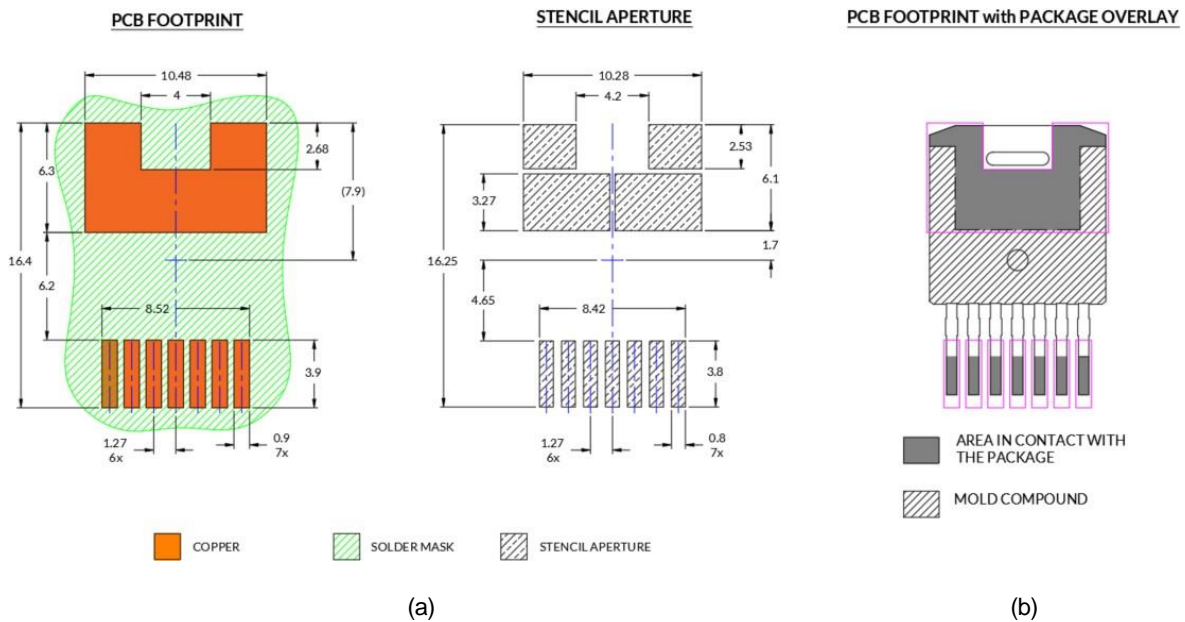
D2PAK-7L (a) PCB land pattern with dimensions in millimeters, (b) footprint overlaying land pattern highlighting area within land pattern in contact with package metal.
